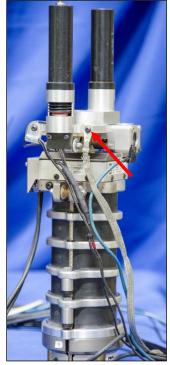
Head/neck ground strap attachment to head/neck mounting platform
